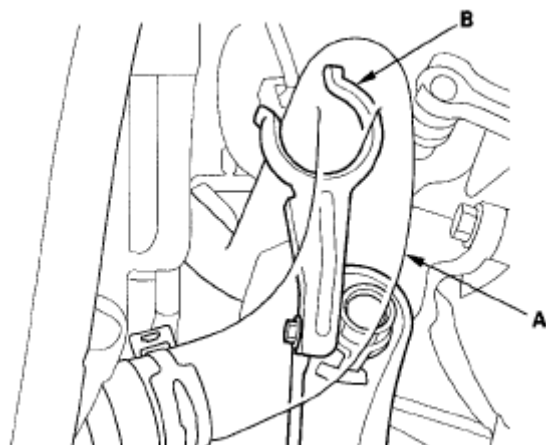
Identifying Lower Radiator Hose (A) To Radiator Hose Stay
